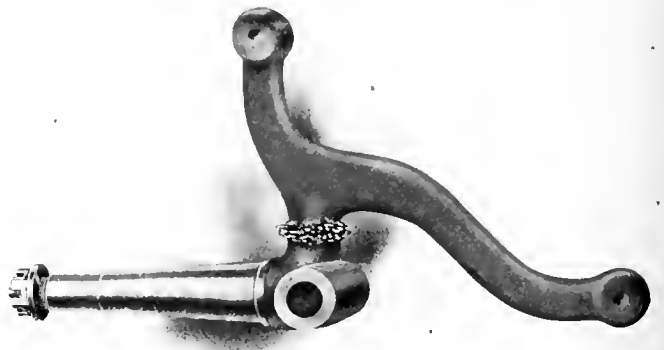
Welding Operation on Automobile Steering Knuckle and Lever.
